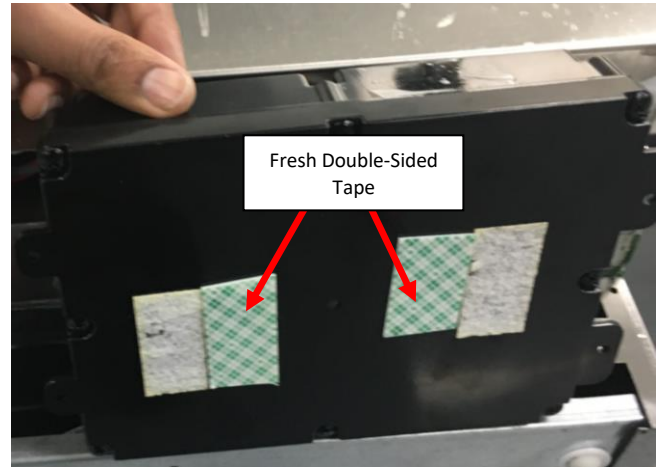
Controller Board Enclosure with fresh double-sided tape.
